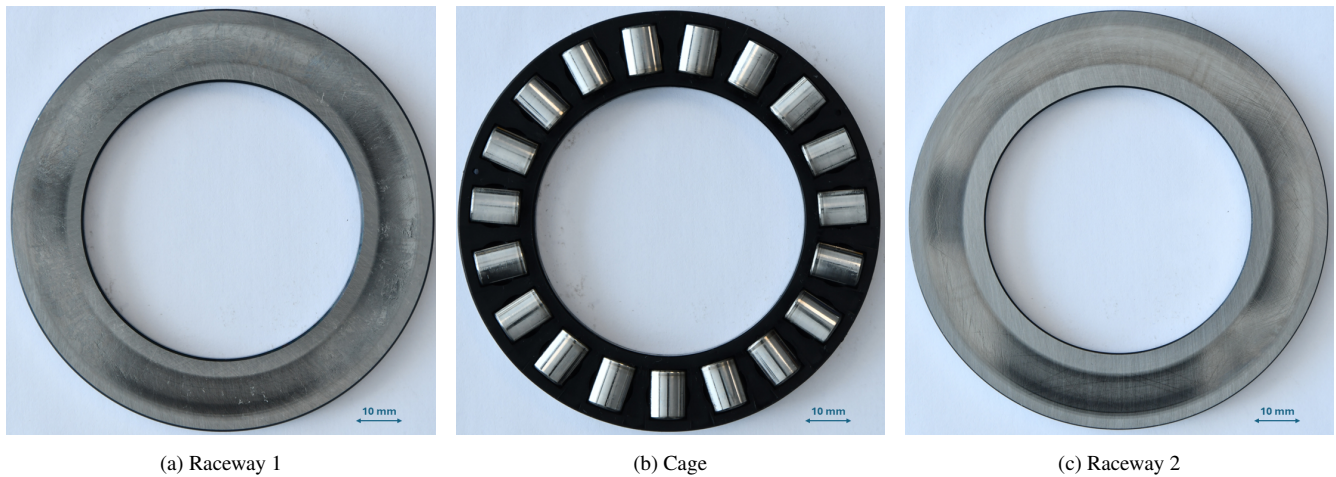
Pictures of bearing components for Bearing 1 of T03. Refer to Table 5 for designation of tests. The outer diameter of the bearing is 95 mm and the diameter and length of the rollers are both 11 mm.
